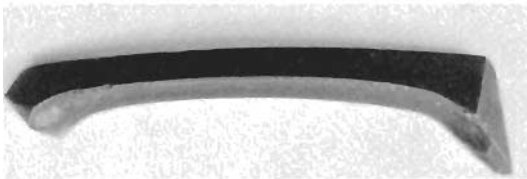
Spiral bevel gear tooth. Internal rupture lifting the entire top of a tooth.
